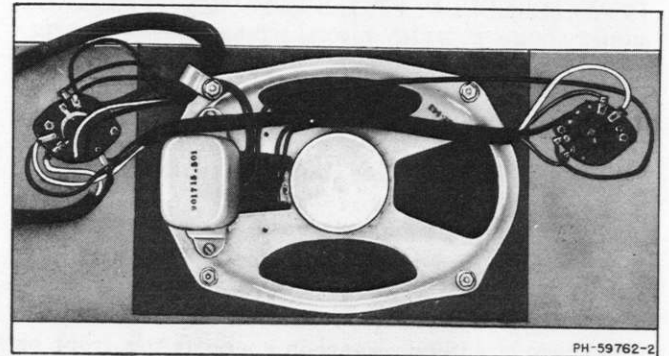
Loudspeaker Assembly, Navy Type CRV-49526-A—Rear View
